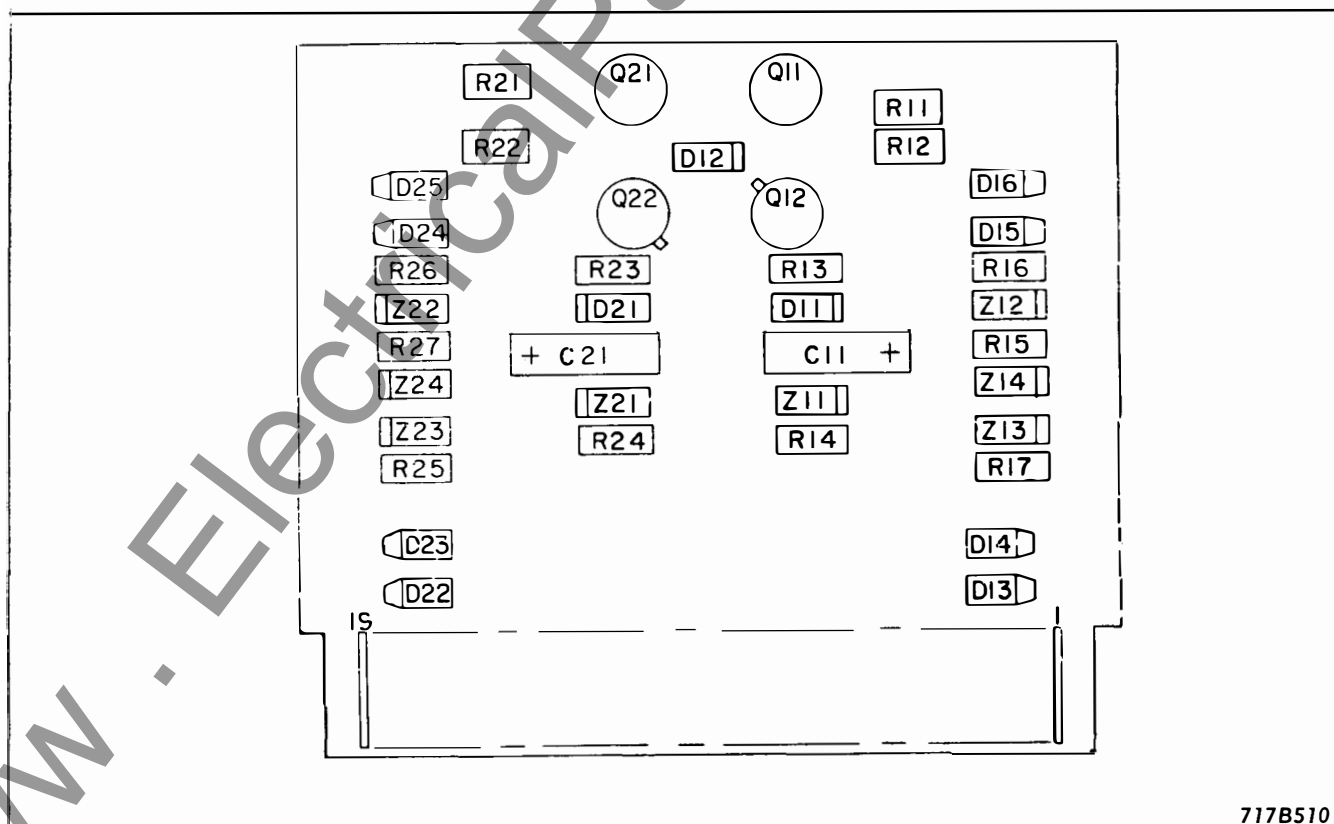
Component Locations of the Transmitter Printed Circuit Board.
